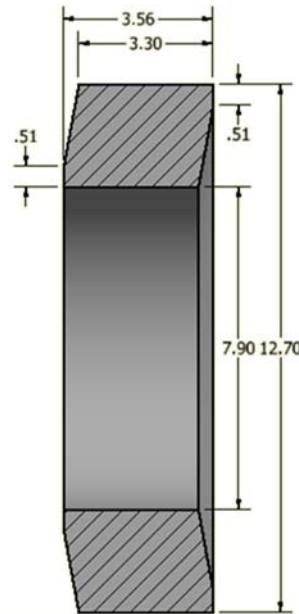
Proposed V-shaped p-type ring (dimensions in mm)
